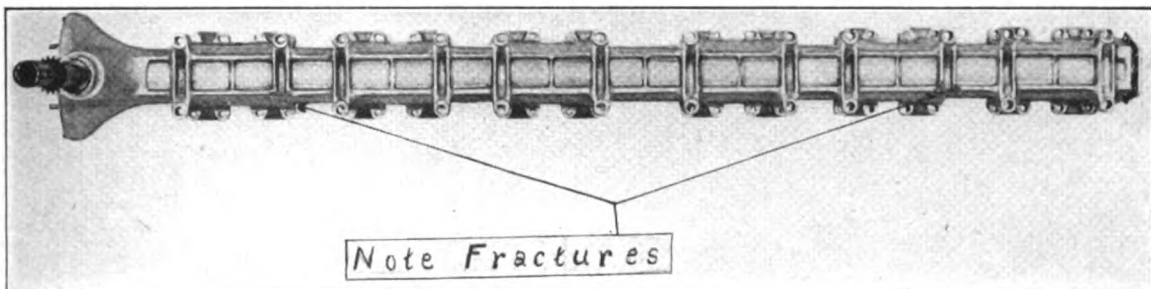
Camshaft housing showing typical fractures after endurance run. (Left bank.)
